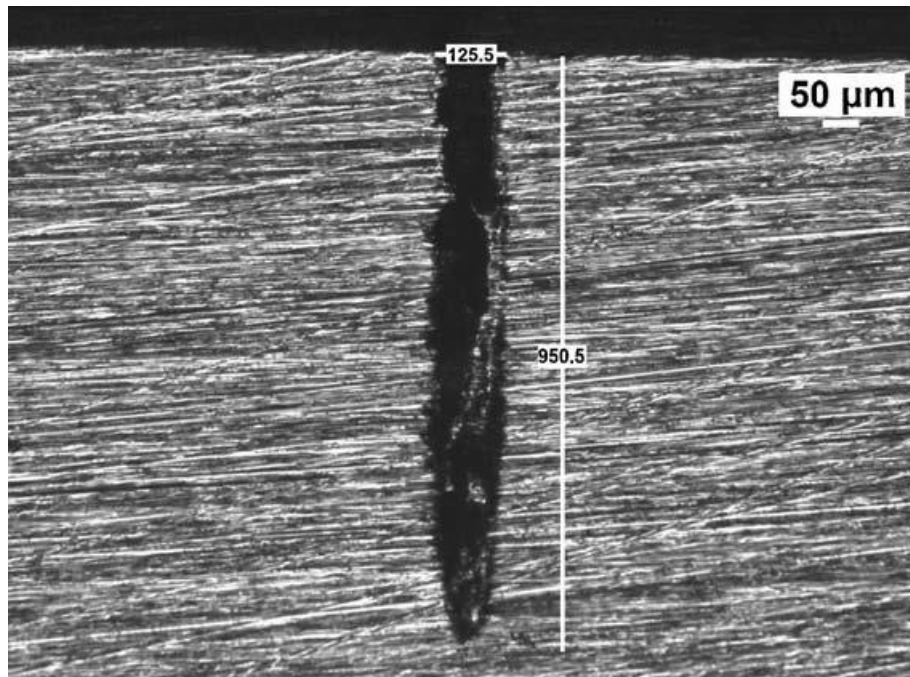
Example blind hole in mild steel fabricated by laser drilling [53]
